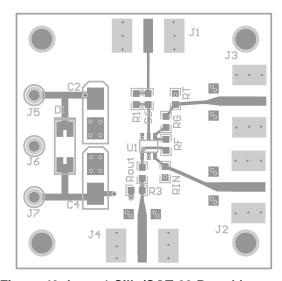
Layer1 Silk (SOT-23 Board Layout)
